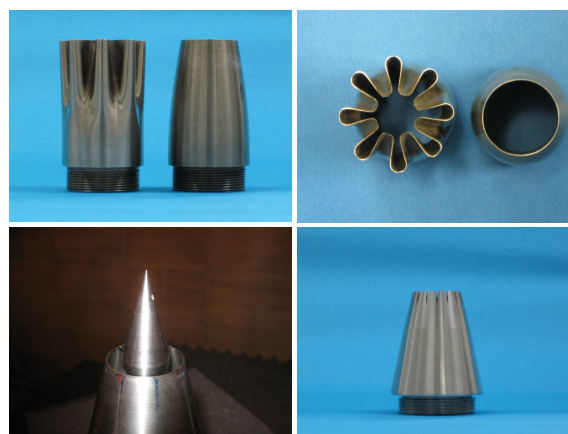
Examples of nozzle. Top-left : Lobe and conical nozzle (side view), top-right : lobe and conical nozzle (top view), bottom-left : plug nozzle, bottom-right : slit nozzle.
